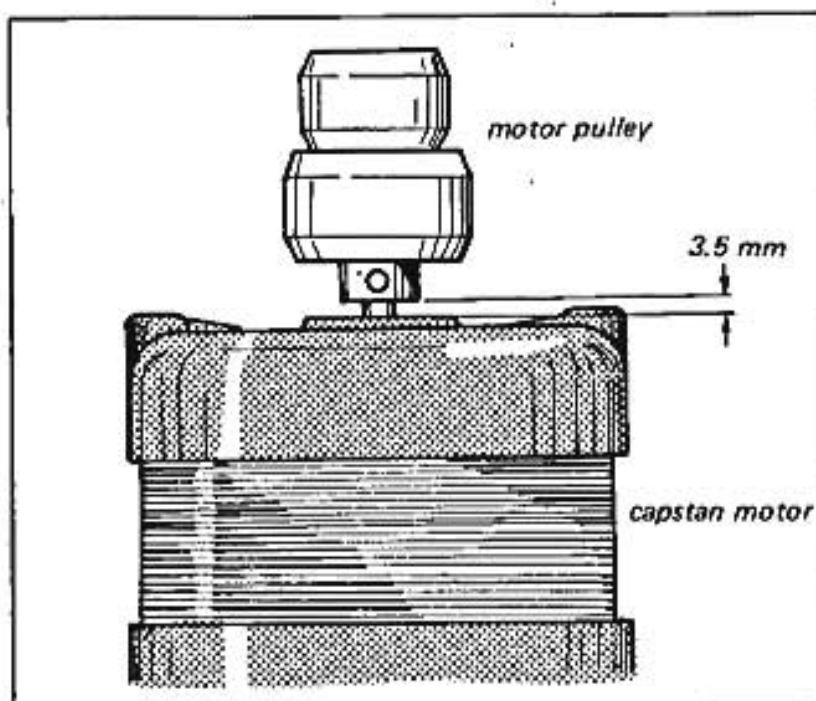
Proper clearance between the motor pulley and the capstan motor
